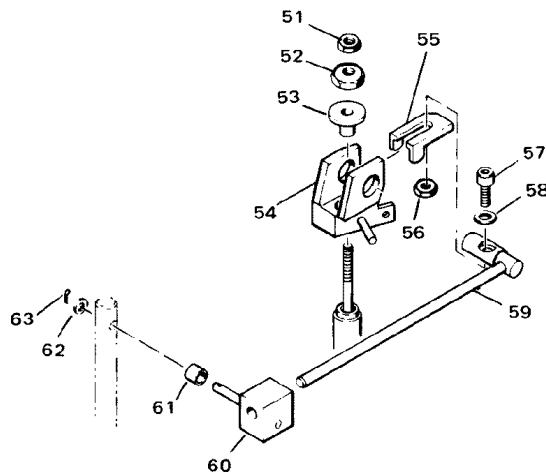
Exploded View of Rod Type Speed Droop Linkage
